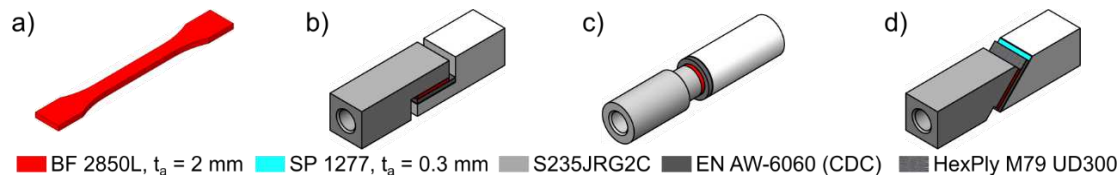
Basic adhesive test specimens, a) Tensile Test Specimen, b) Thick Adherend Shear Specimen, c) Butt Joint Specimen, d) Scarf Joint Specimen
